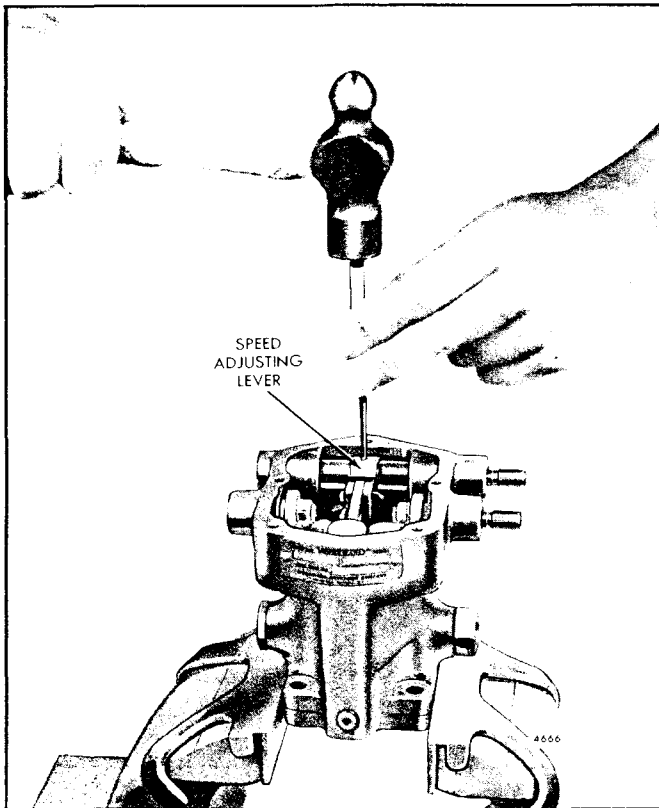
Removing Speed Adjusting Lever Roll Pin
